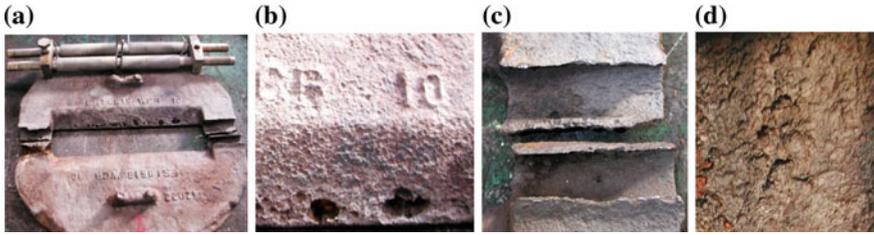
a Failed butterfly check valve disc with two pivots. b Erosion area of the check valve. c Bushings after galvanic corrosion. d Inner surface of the butterfly check valve after erosion
